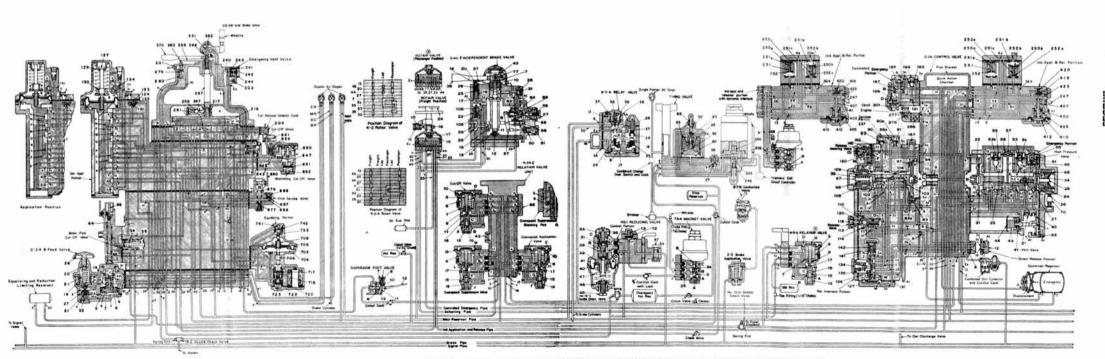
Handle Positions, 24-RL Equipment With Pressure Maintaining Brake Valve
